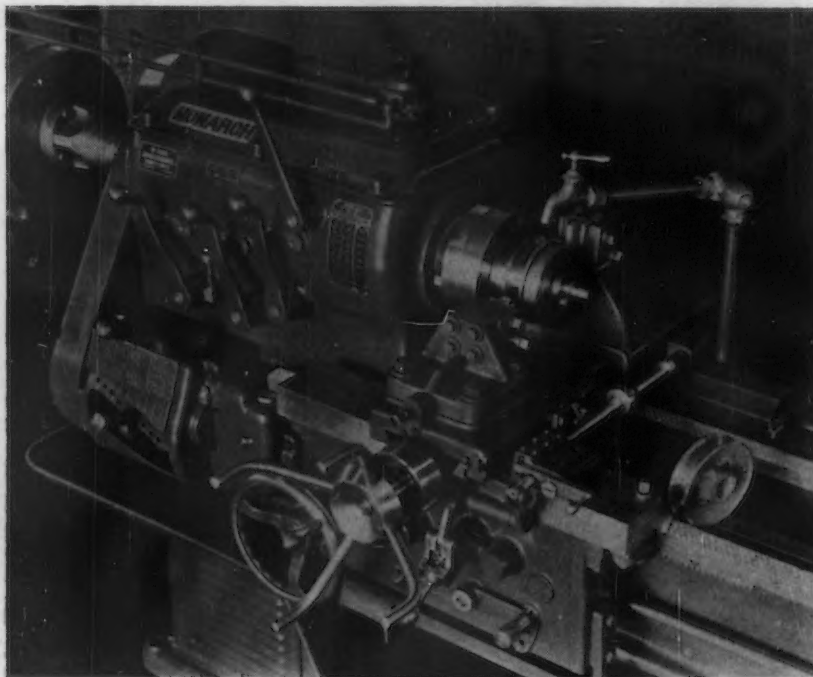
One operator handles two 16-in. lathes in the machining of bronze trolley wheels. The equipment employed includes—air-chuck; separate front and rear tool slides, with right and left hand cross feed screw; automatic cross feed diameter stop, which disengages power cross feed to both tool slides when the correct diameter has been reached. The carriage remains in a fixed position clamped to the bed.
